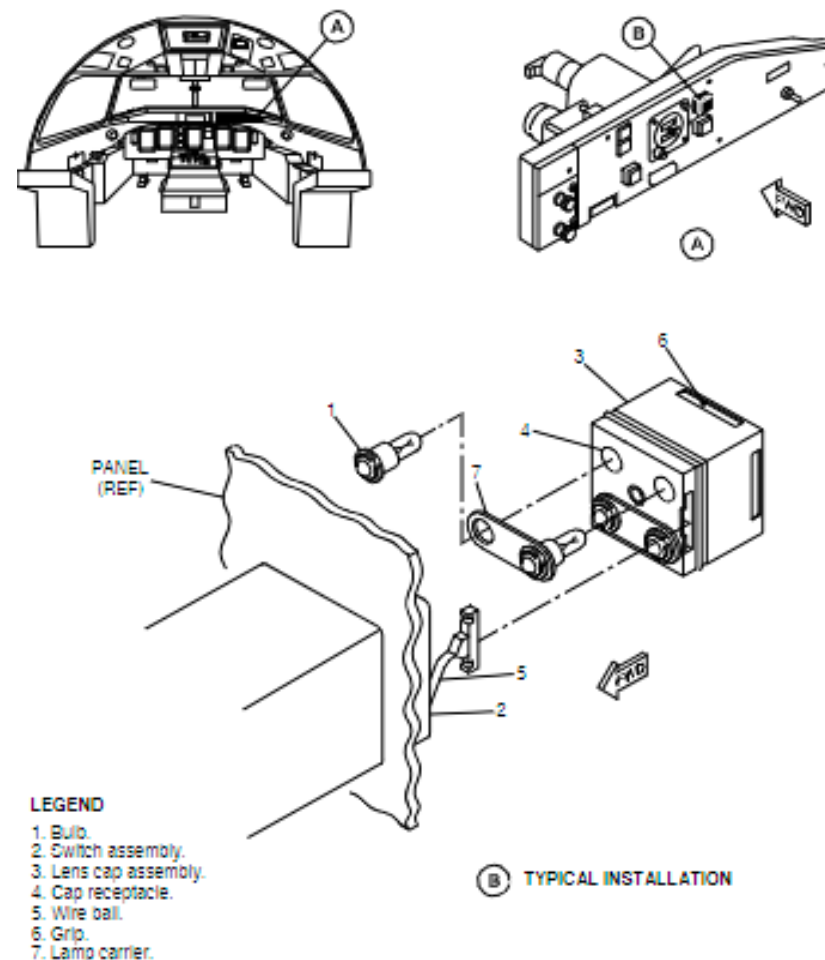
Lens Cap Assembly and Switch Light Bulb – Replacement
